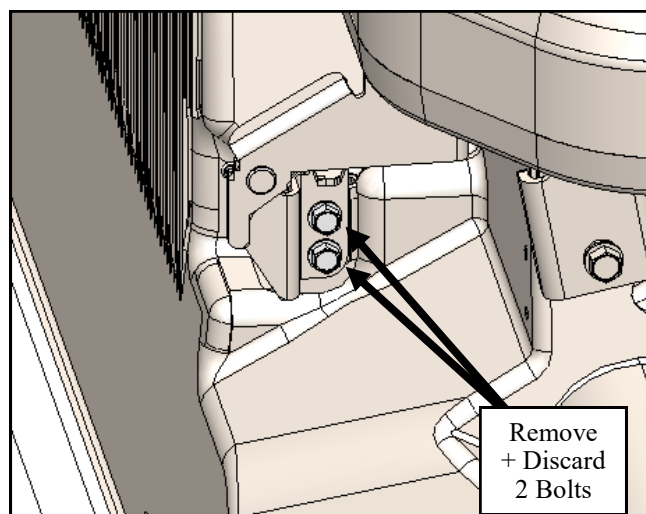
(Remove Base Pivot Bracket OE Bolts)
